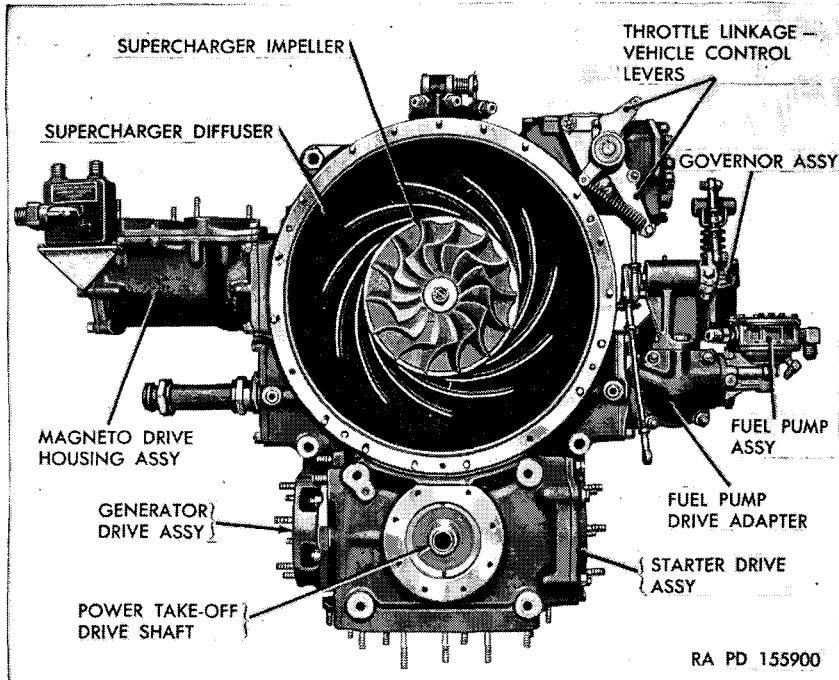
Accessory case assembly (supercharger housing removed)—front view.
